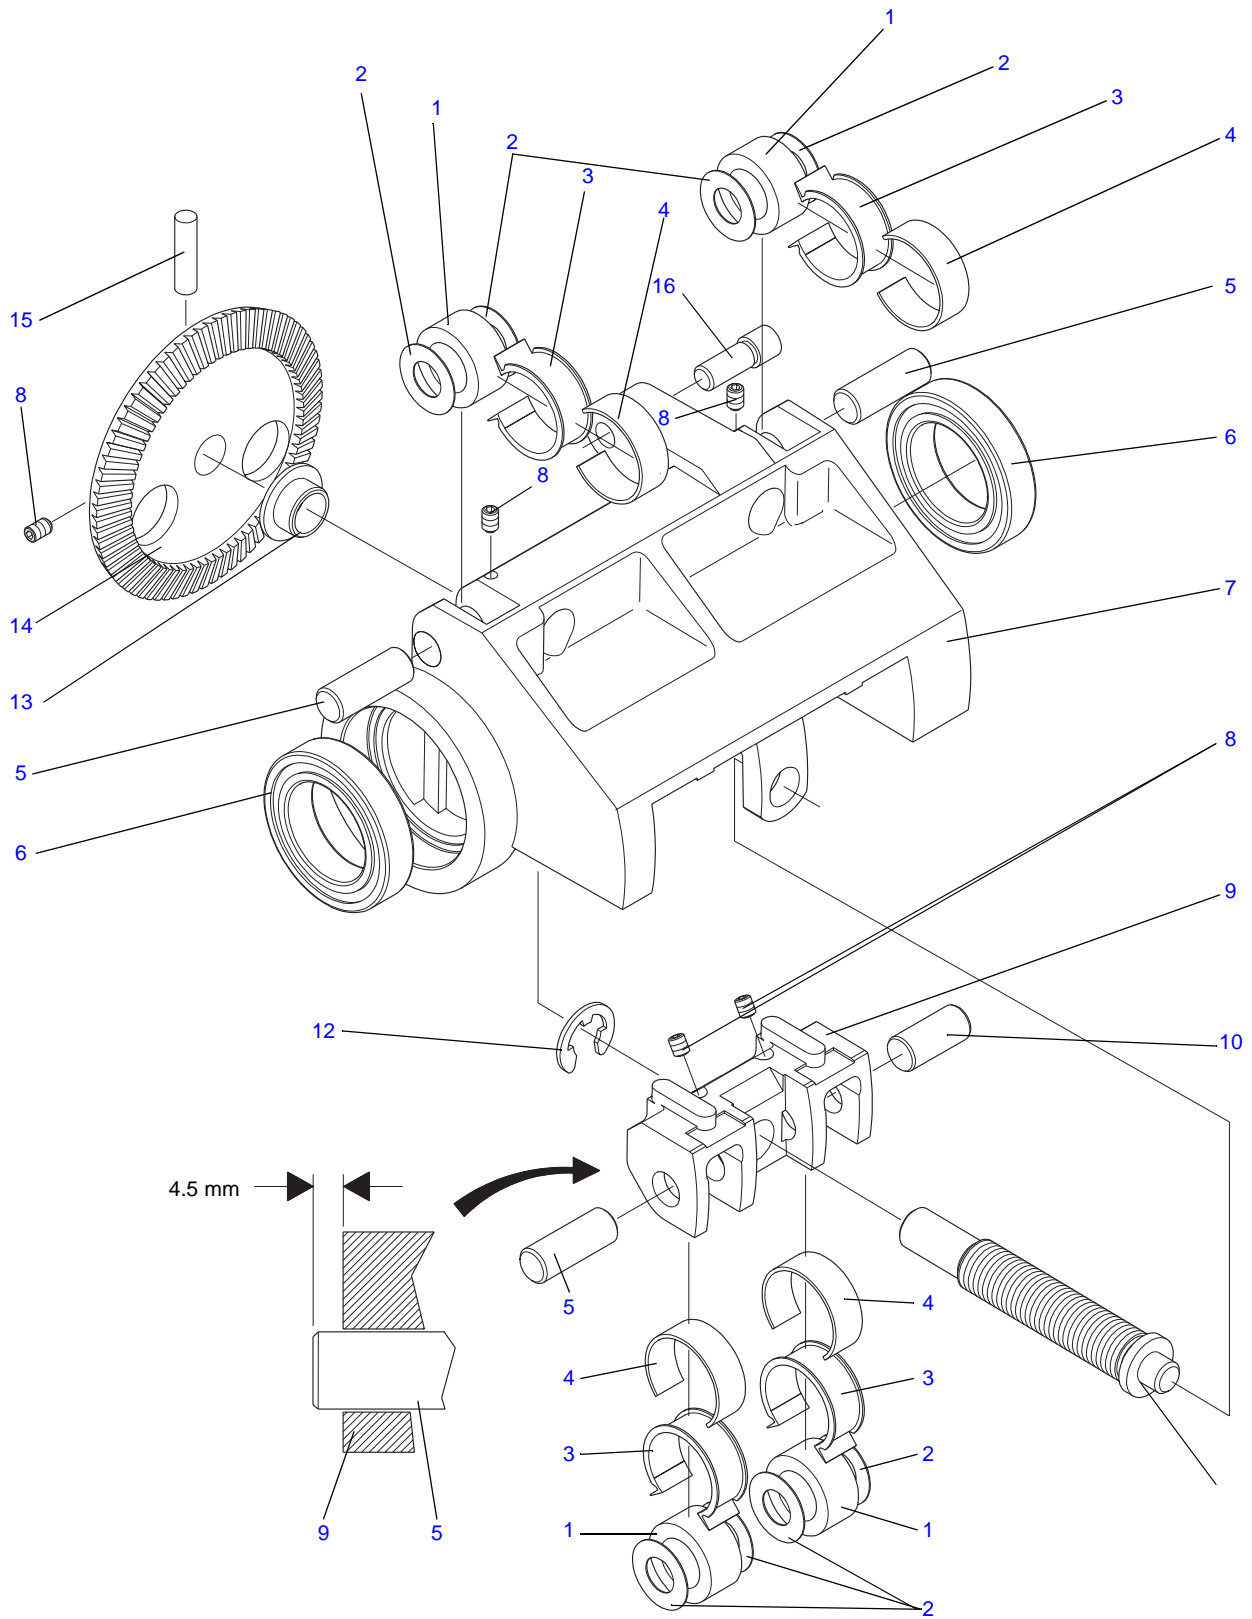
Vector 70/70H Pan and Tilt Head - Mechanism Housing Assembly (Sheet 2)
